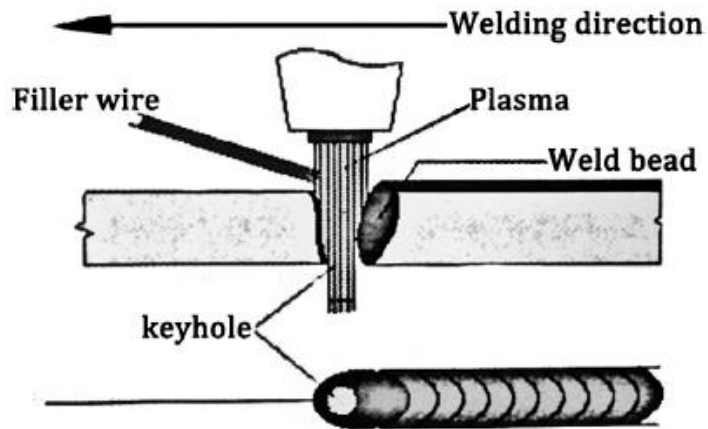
Schematic of keyhole plasma arc welding [18].
